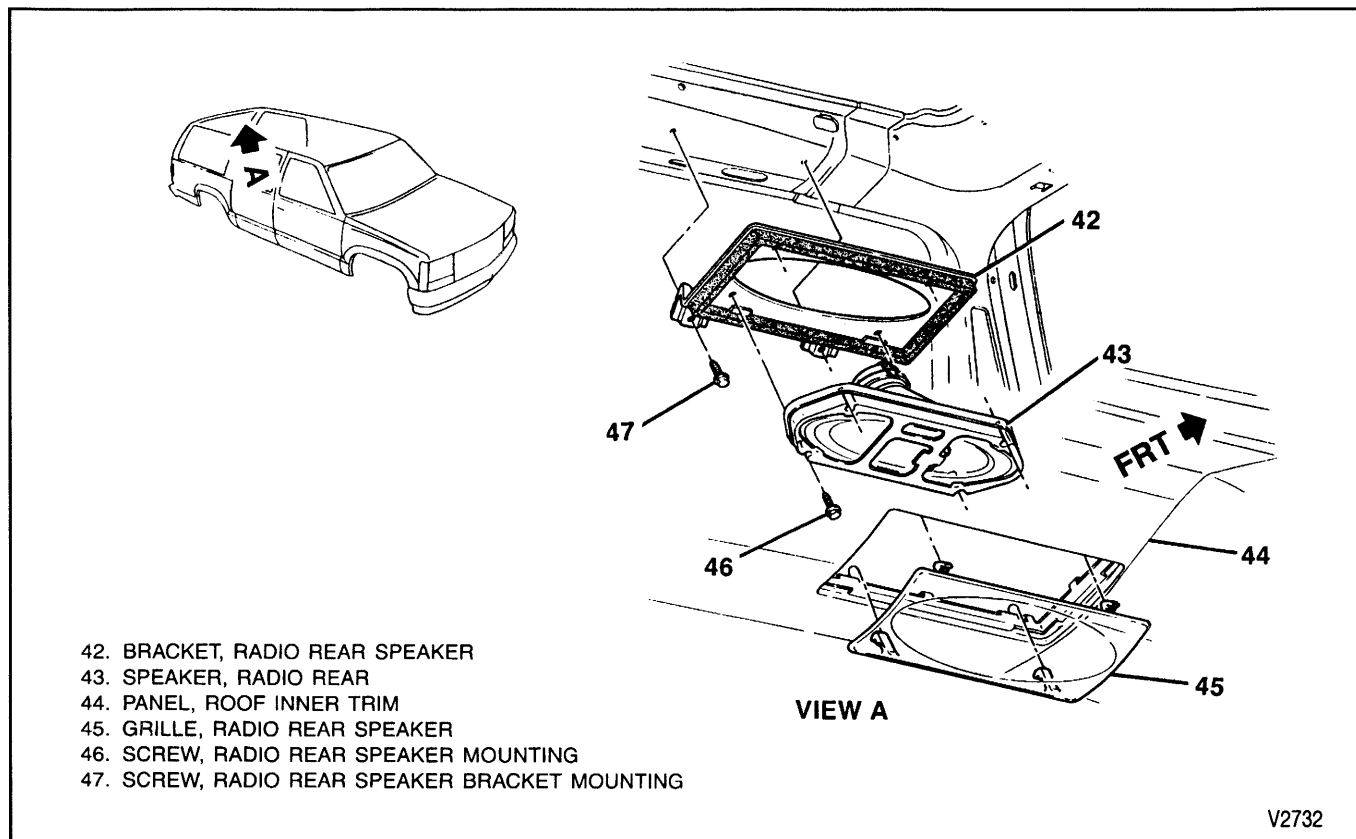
Rear Overhead Speaker Assembly (Suburban and Utility Models)
